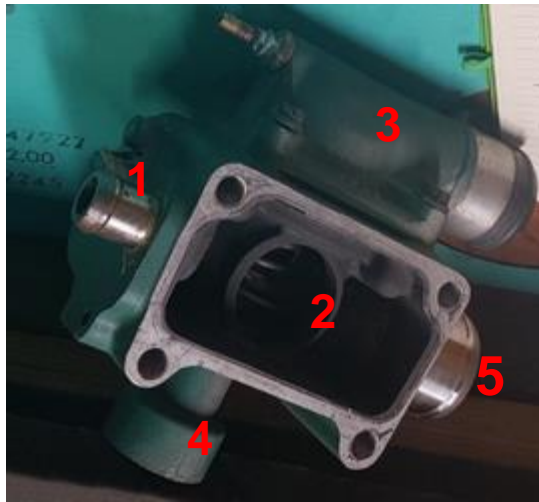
D8k thermostat housing. 1, cab heater return. 2, wax valve. 3, cab heater outlet. 4, thermostat housing return to engine body. 5, radiator outlet.
